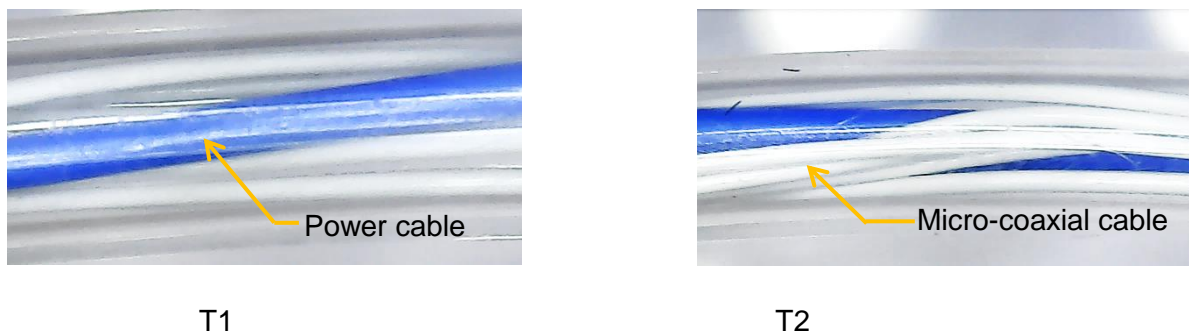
Cables in specimens T1 and T2 showing no signs of failure when viewed with a USB microscope after the three-point bending test
